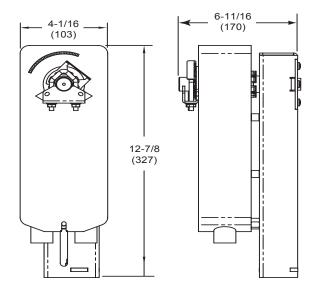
Mx41-715x-230 Actuator/Linkage Assembly
